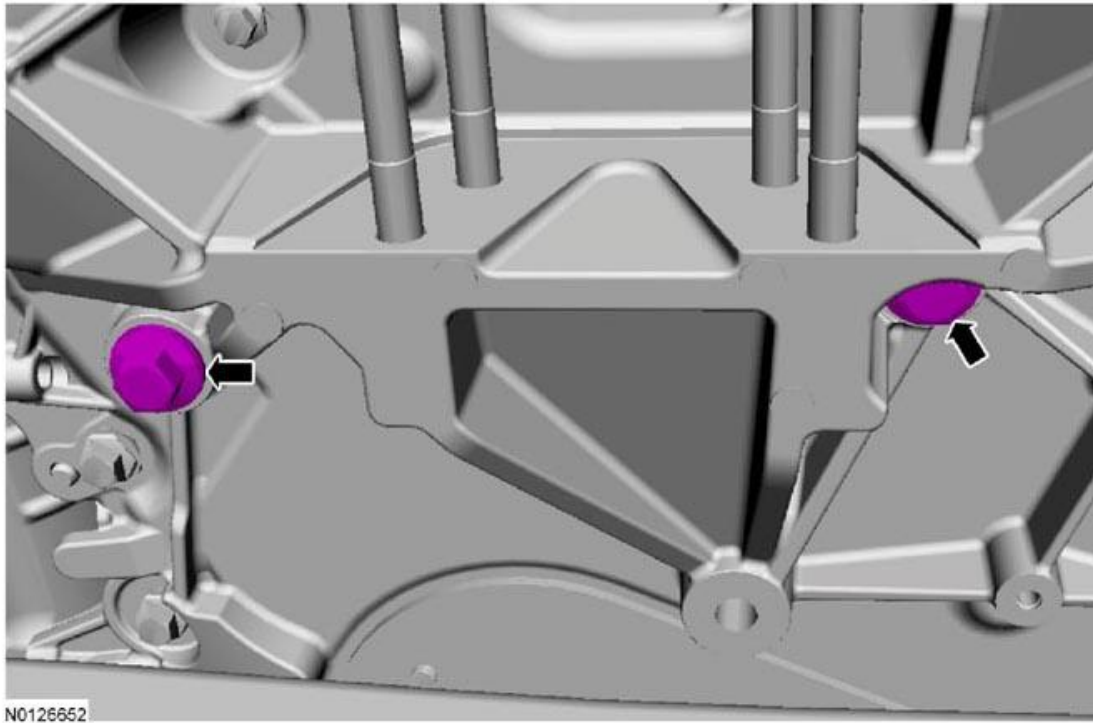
Locating Exhaust And Intake VCT Unit Bolts
